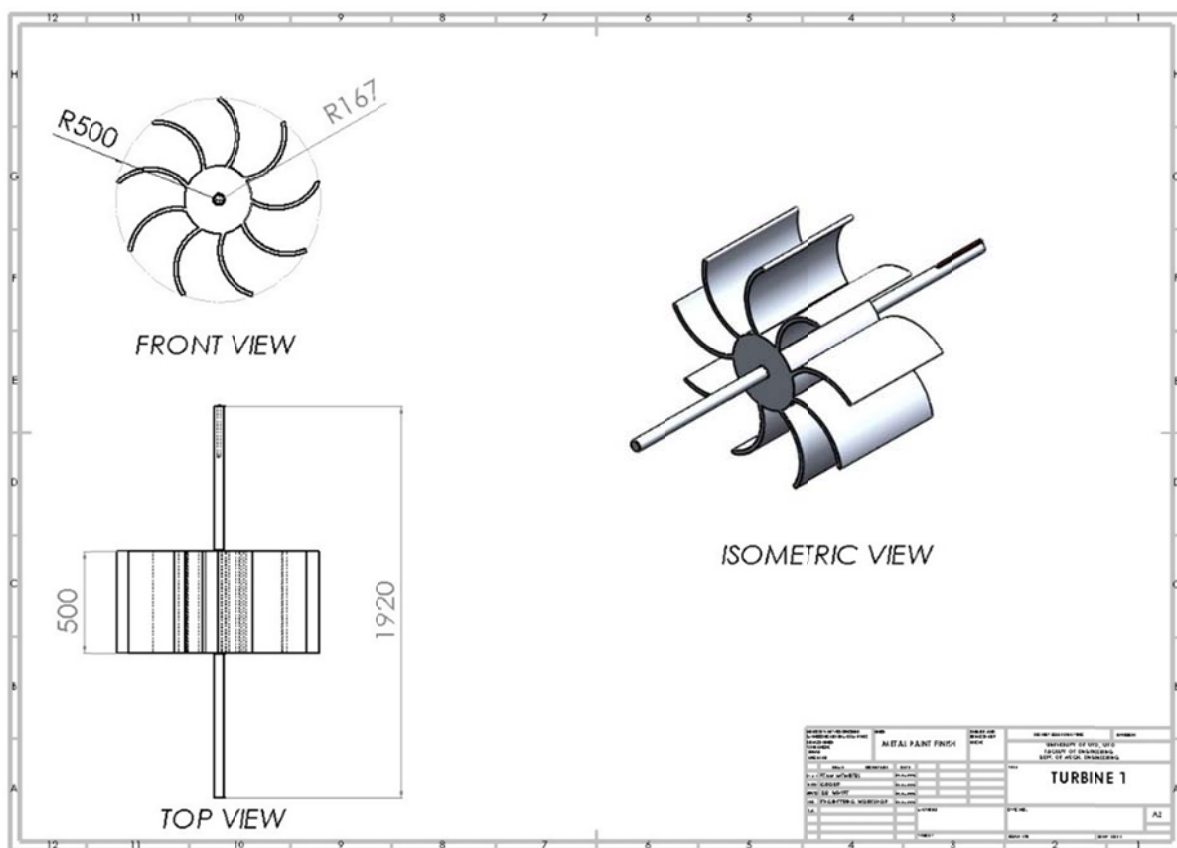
The CAD Drawing of Turbine 1 Showing Key Geometric Dimensions
